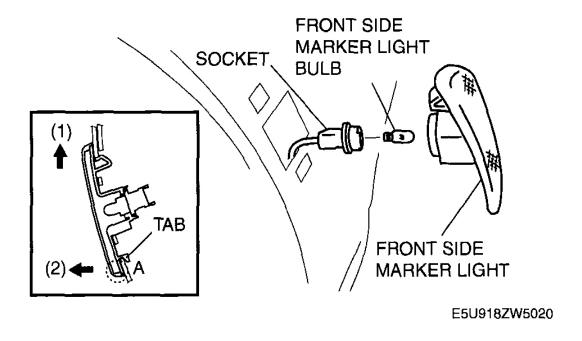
Removing Front Side Marker Light Bulb Courtesy of MAZDA MOTORS CORP.
